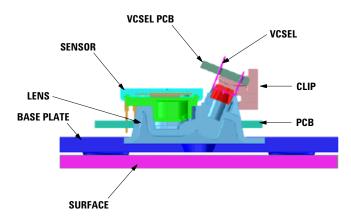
Sectional view of PCB assembly highlighting optical mouse components.
